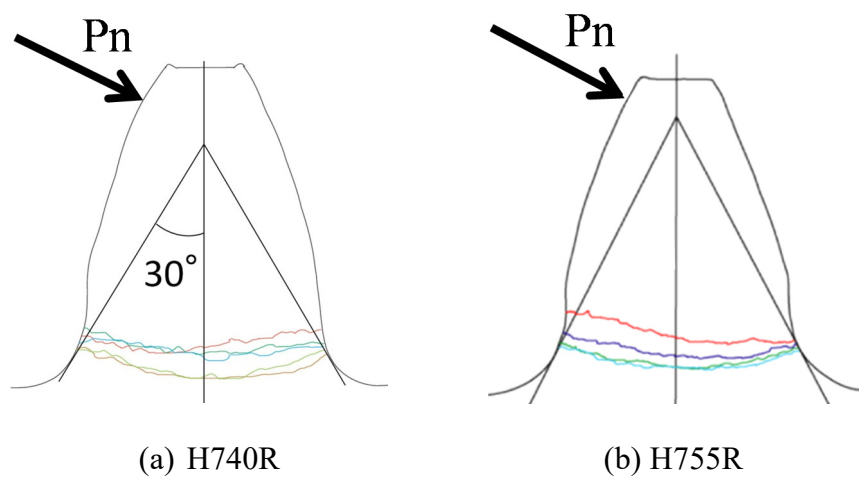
Crack propagation profiles of the surface-rolled P/M gears made of H material used single tooth bending fatigue test. (a) H740R, (b) H754R.
